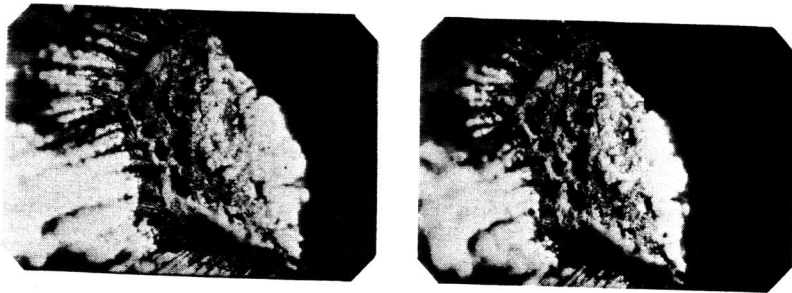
Stereofractograph of specimen fractured at 85 °K.
